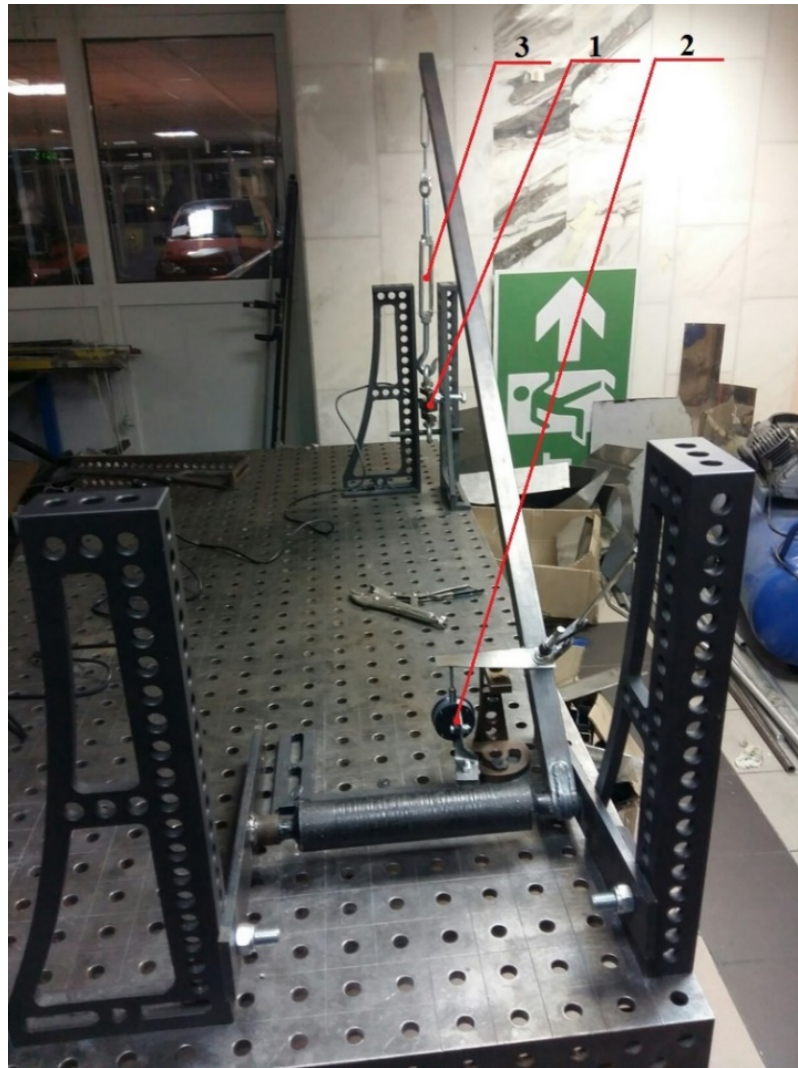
Test fixture: 1 - strain gauge, 2 - dial indicator head, and 3 - tightening device
